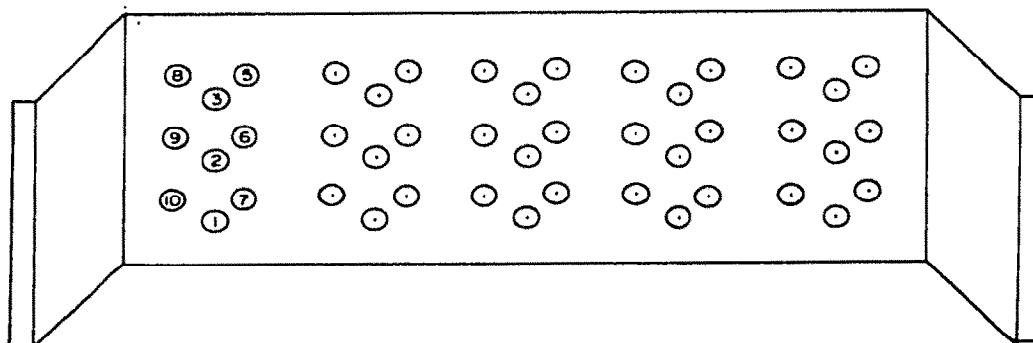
Arrangement of amplifier terminal jacks on a 7×19 in. recessed panel mounting chassis.
